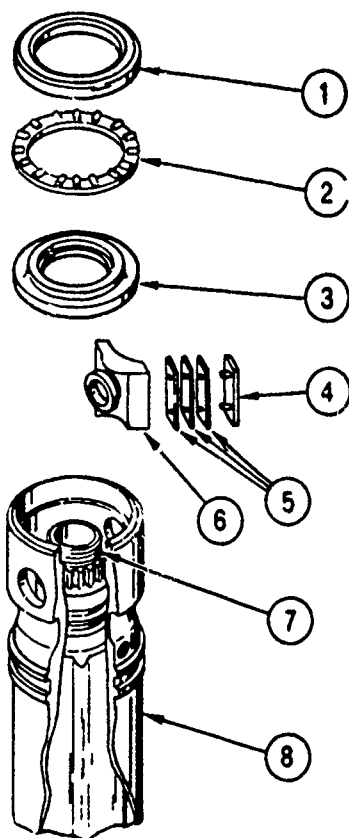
Removing Piston and Orifice Support Tube from Cylinder, Exploded View
